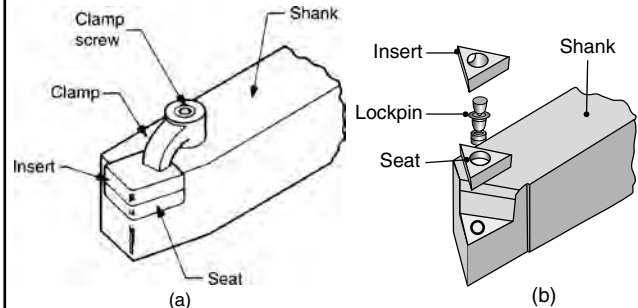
(a) Insert clamped to shank of a toolholder; (b) insert clamped with wing lockpins.
